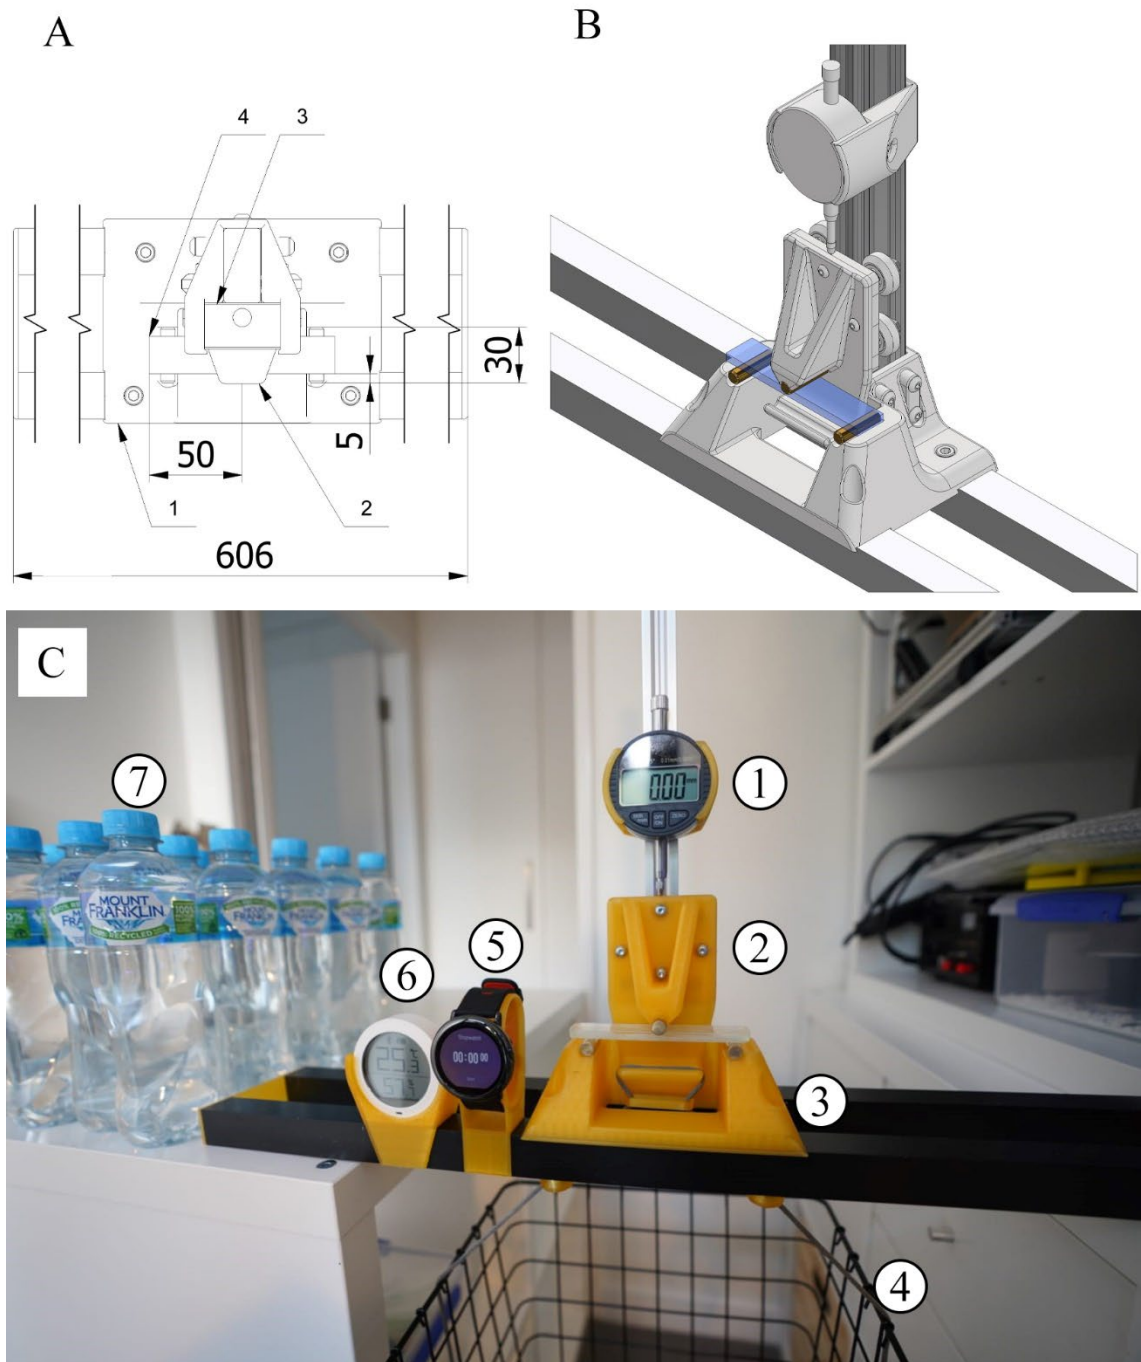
CAD model of pandemic tool head position relative to sample. A) top view. B) isometric view. C) photography of 3D printed three-point bend test solution. Numbers 1-4 in A depicts base, tool head, dial indicator, and sample, respectively. Numbers 50, 5, 30, and 606 in A indicate midpoint of the sample (mm), distance between sample, and pins (mm), pins length (mm), and length (mm), respectively. Numbers 1-7 in C indicate depth gauge, tool head, tool base, basket for weights, timer, thermometer and hygrometer, and 500 g weights, respectively.
